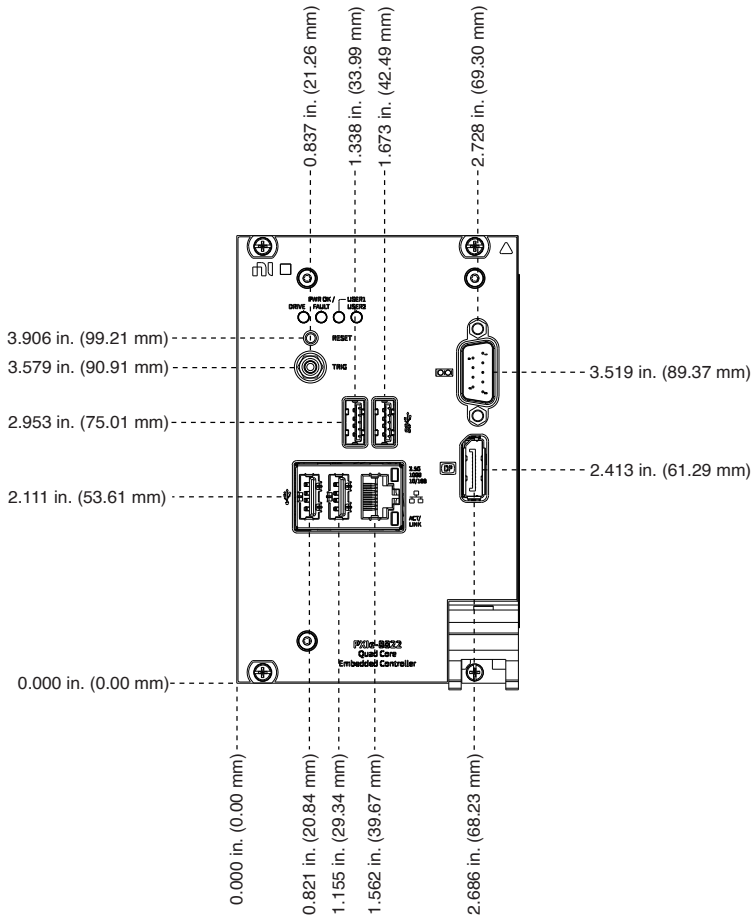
PXIe-8842 Front Panel Layout and Dimensions
